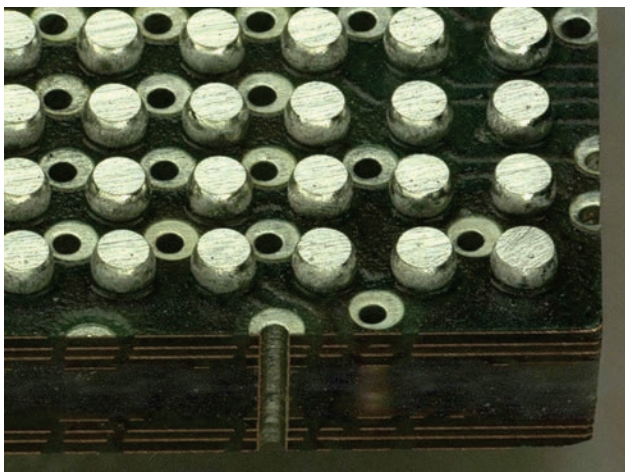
After exposing all of the balls and blowing away the rest of the solder resist, the balls can be inspected from all sides. No soldering problems were identified.
